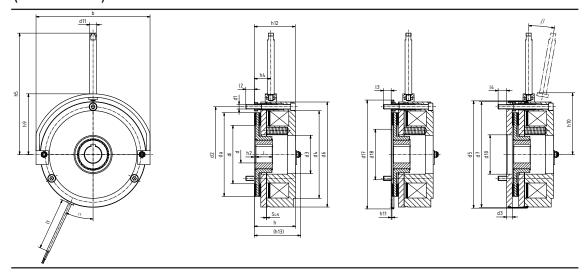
Basic module N, without adjusting ring; without counter friction surface
